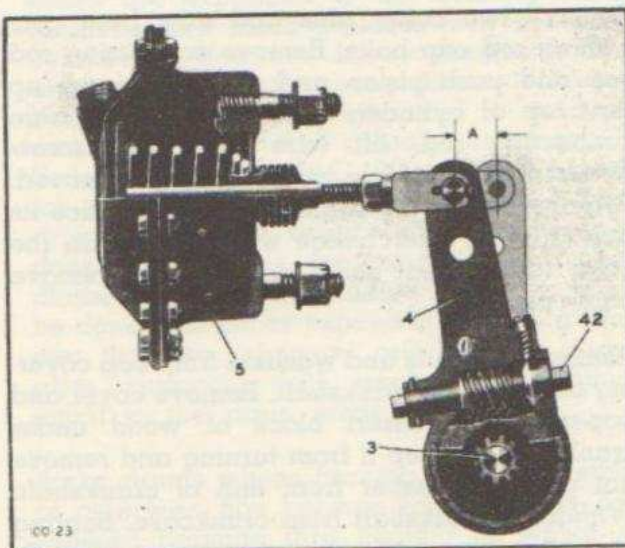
Brake Chamber and Slack Adjuster for Foot Brake
